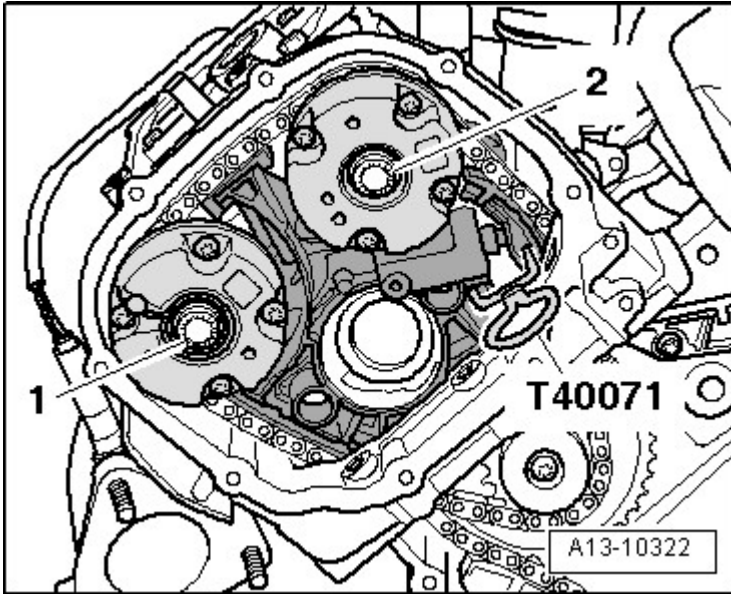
Identifying Bolts On Left Cylinder Head And Removing Both Camshaft Adjusters
